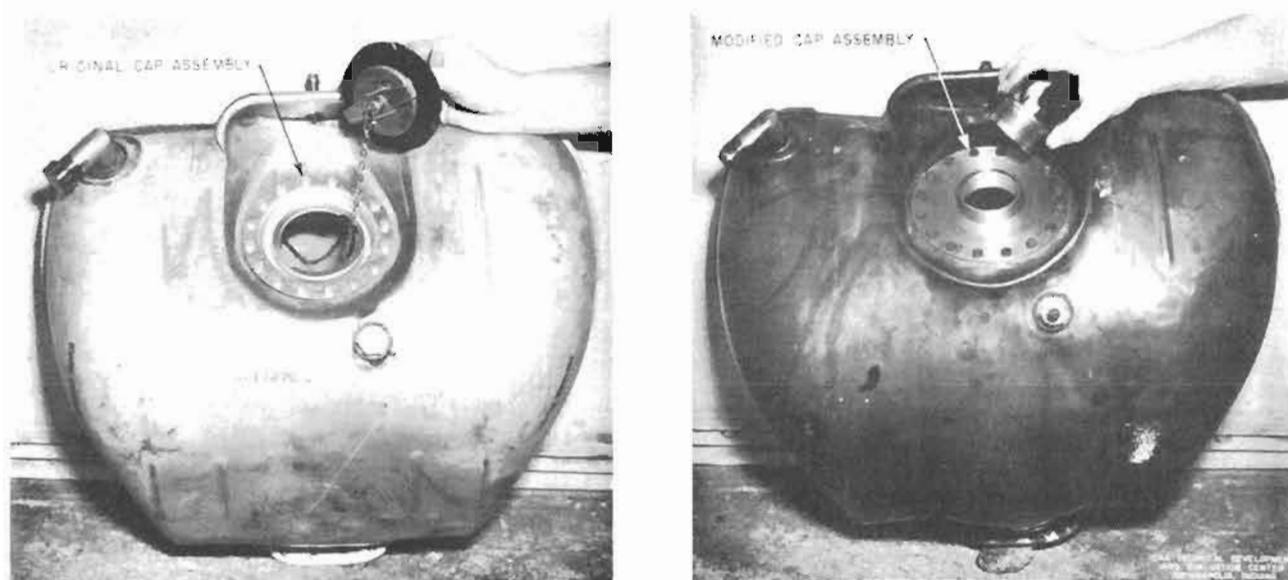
Steel Oil Tanks, Showing the Quick-Opening Filler Cap and the More Fire-Resistant Screw Type Filler Cap
